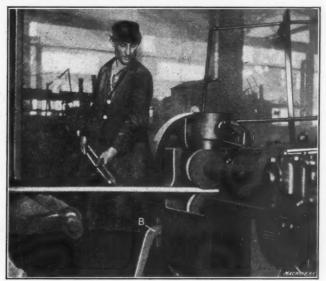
Ajax Continuous-motion Bolt and Rivet Machine in Action making 1½-inch Rivets
